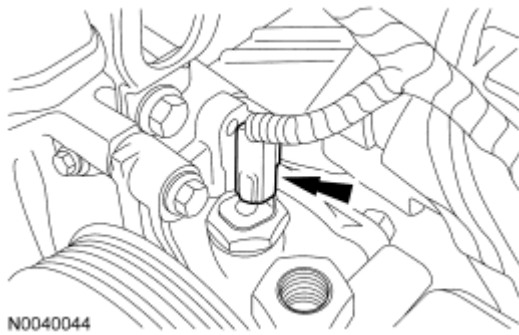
Locating Power Steering Pressure (PSP) Switch Electrical Connector
